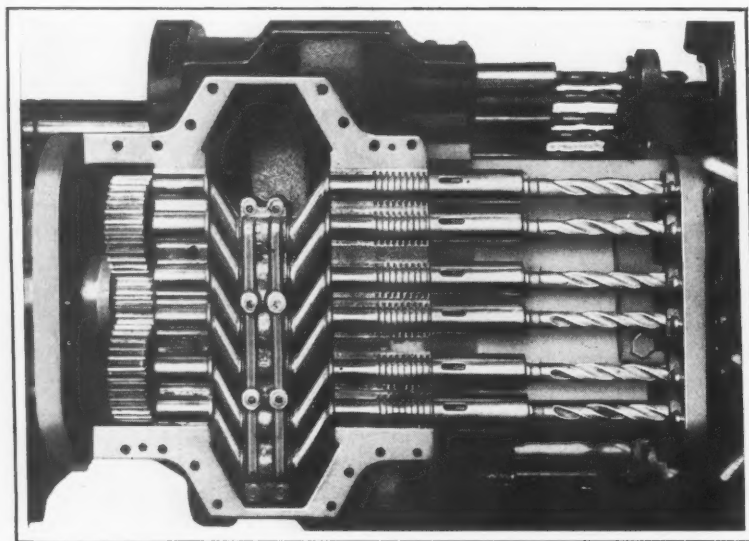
Method of Rotating the Closely Spaced Drill Spindles
